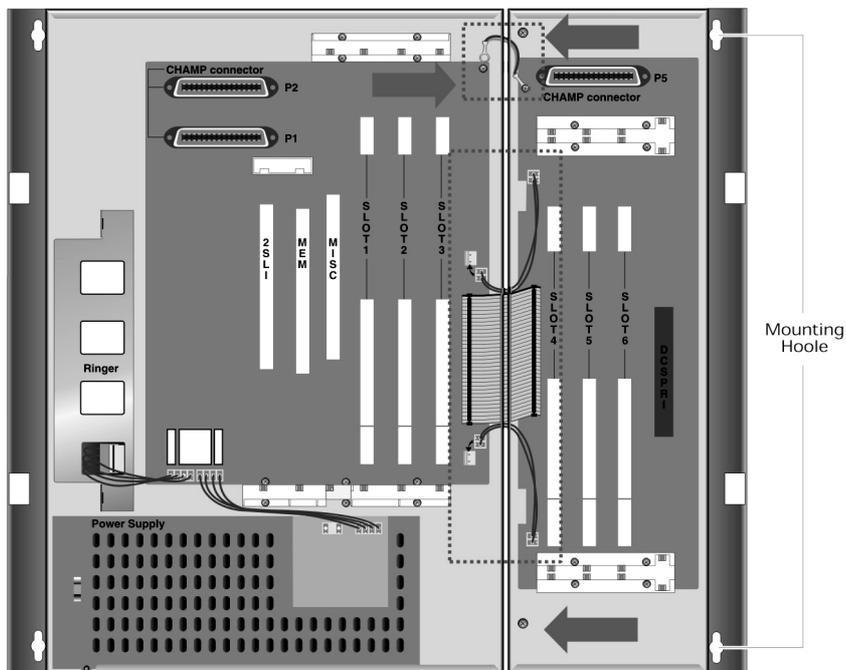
Assemble Between Basic KSU & EXP.Cabinet (2)
